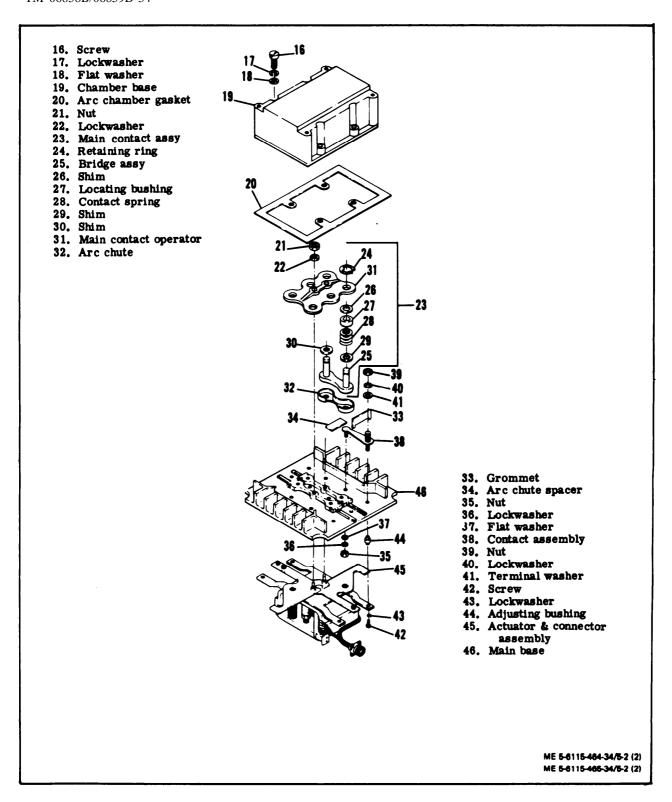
Main Load Contactor, Exploded View (Sheet 2 of 3)
